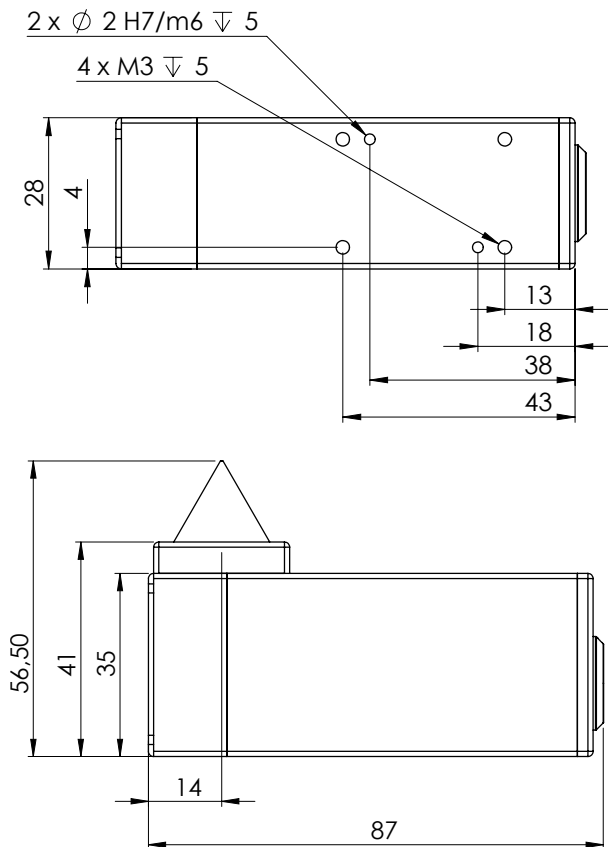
Dimensional drawing Industrial Angle sensors LLP1.6, LHP1.66
